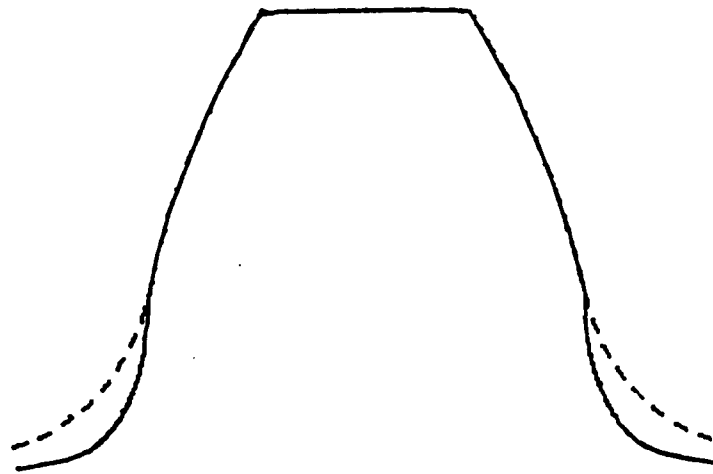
Spur Gear Example; Path for Wire EDM of Forging Punch
